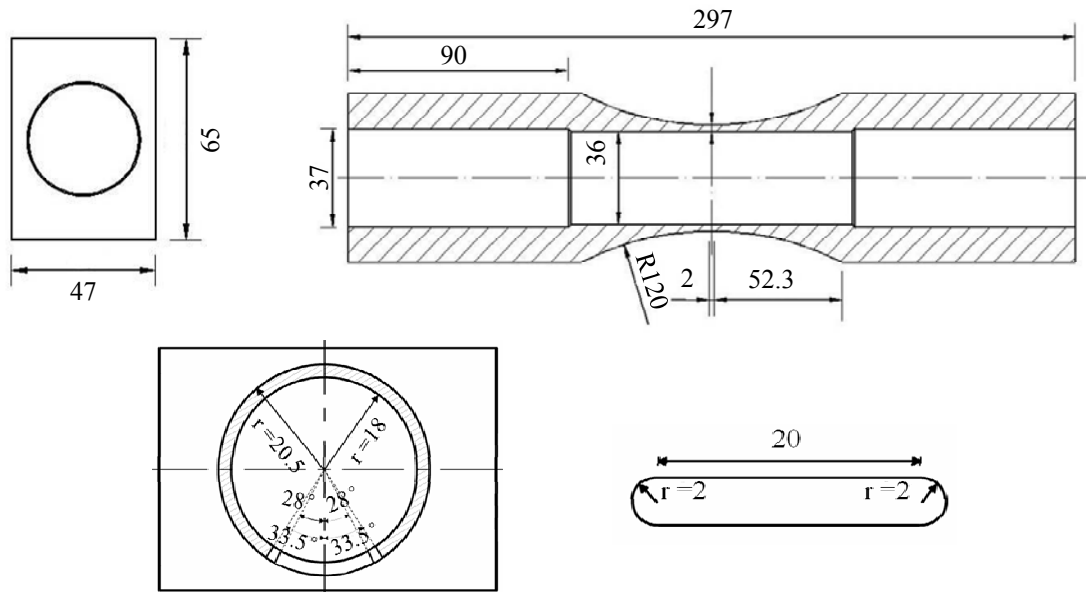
Specimen and notch geometry (dimensions in millimetres)
